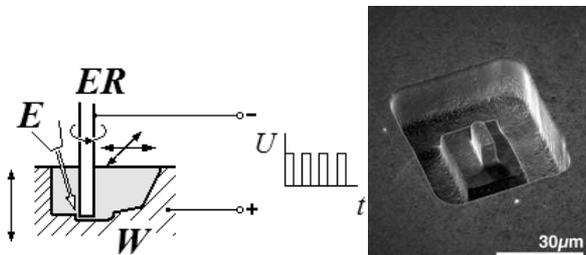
Principal scheme of the Pulse Electrochemical Micro Machining (PECM) and example of machined part (a micro-cavity in the copper sample [7]): ER – tool electrode (cathode), E – electrolyte, W – workpiece (anode)
